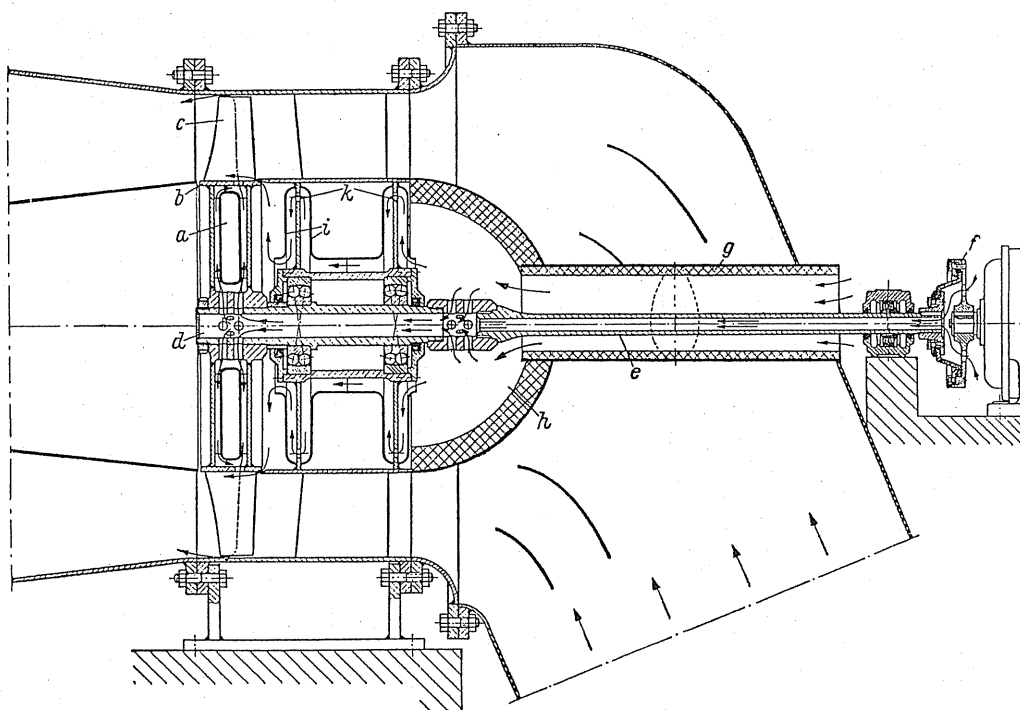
Cooling bearings in the hub of an axial-flow fan (Mabag, Sulzbach). *a*, displacing member, dividing cooling impeller in two parts; *b*, hub cylinder of the axial-flow impeller; *c*, axial-flow fan blades; *d*, hollow space in shaft through which the cooling air is sucked; *e*, hollow supply shaft; *f*, coupling; *g*, shaft cover; *h*, hub cover; *i* and *k*, passage walls.
